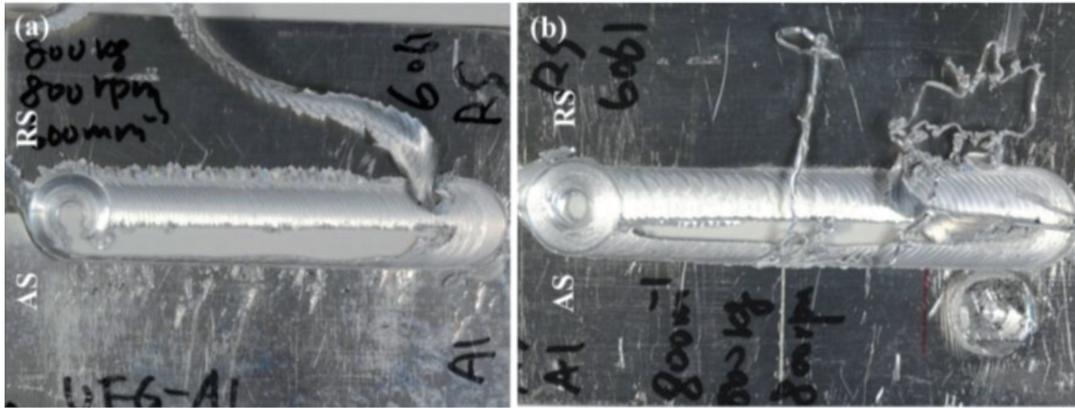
Friction Stir Welded joints obtained at a constant tool rotational speed of 800 rpm and tool traverse speeds of 600 mm/min and 800 mm/min [13].
